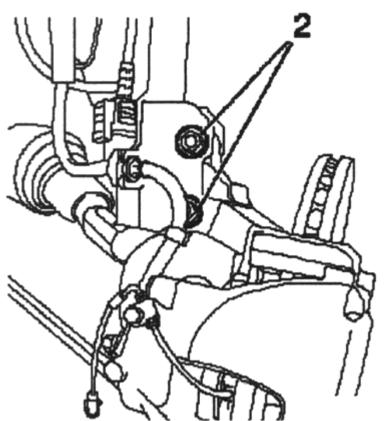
Withdrawal Rotation arm: 1 - turning the lever, 2 - Bolting
